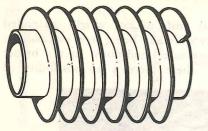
Showing helically wound fins welded to mild steel tube
